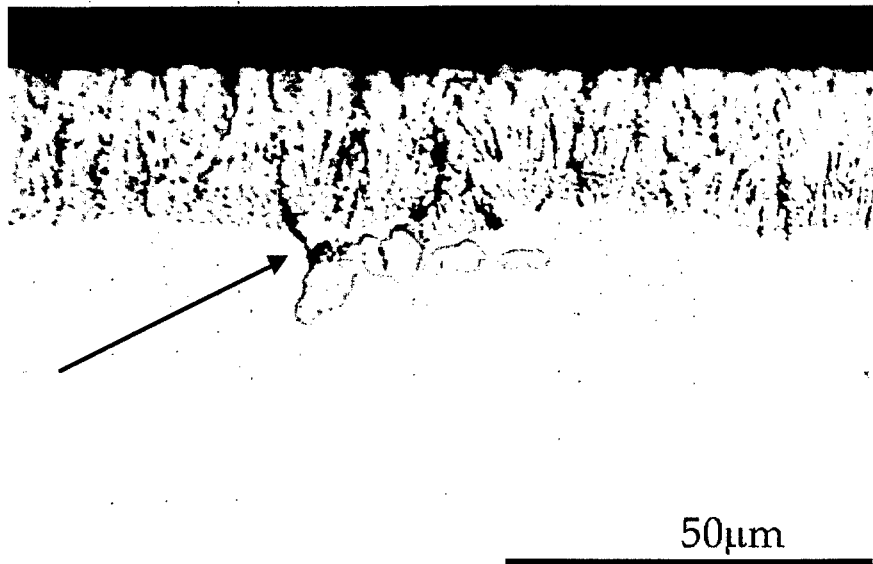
One of the smaller fatigue cracks found during sectioning of a piece (between crack 3 and 4) of the port upper aft wing-attachment hole edge. The crack is gaping due to loading during the breaking open of other cracks. Note that where the crack grows through the large grain the crack path is very straight.
